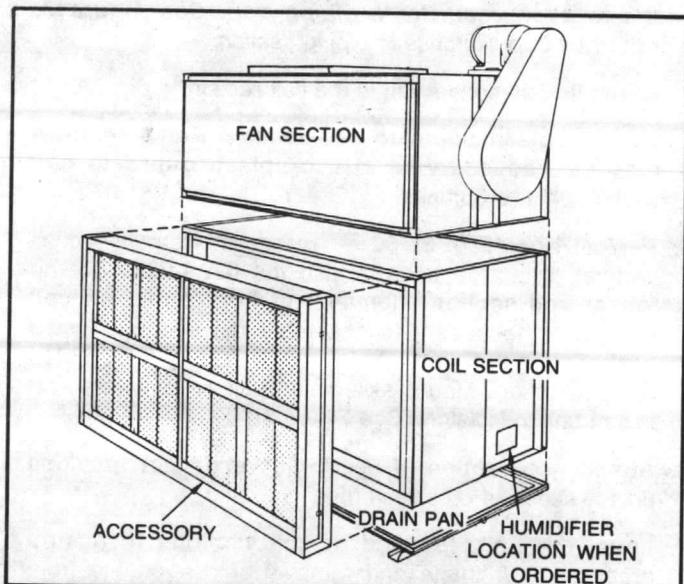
Exploded View of the Vertical Draw-Thru Unit Sizes 35 through 50
